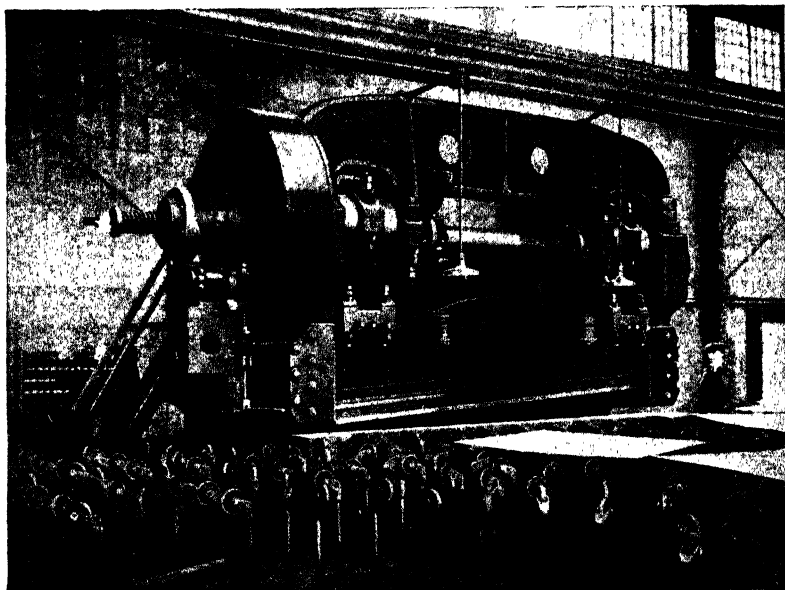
XI. — A plate shear and shear table. (Courtesy of The Mesta Machine Co.)
